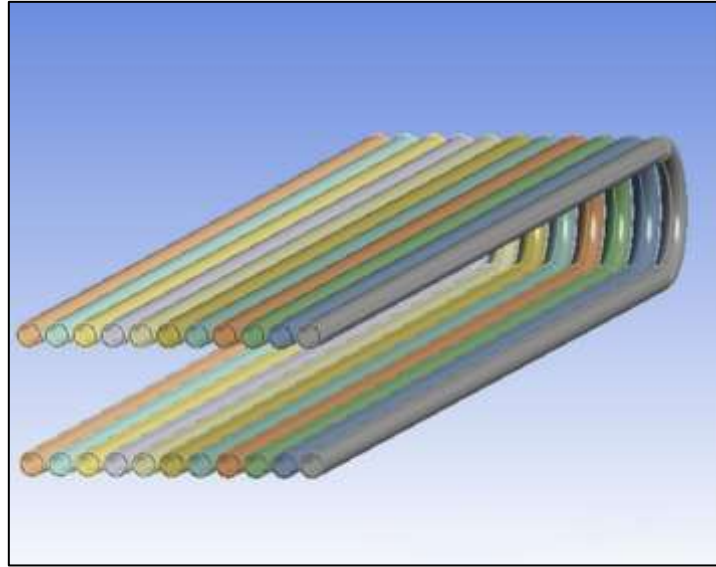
Sectional View for A Geometric Model of the Tube.
